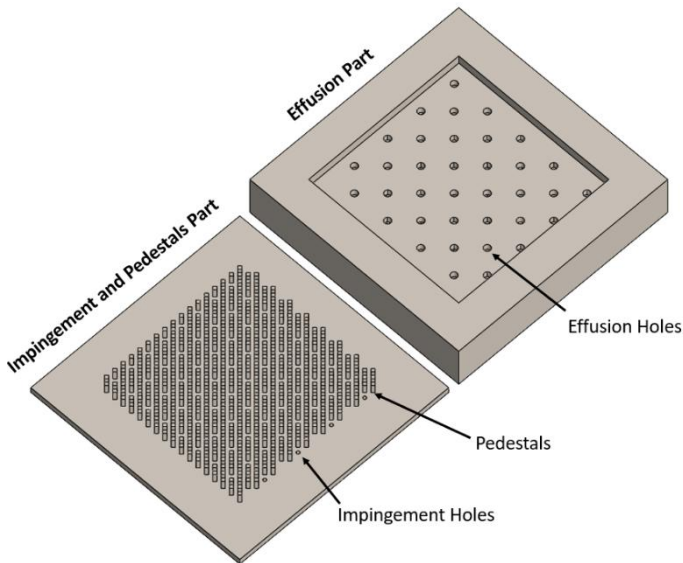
CAD MODEL OF THE TWO PARTS OF A TEST PIECE, WITH INTERNAL WALLS FACING UPWARD
